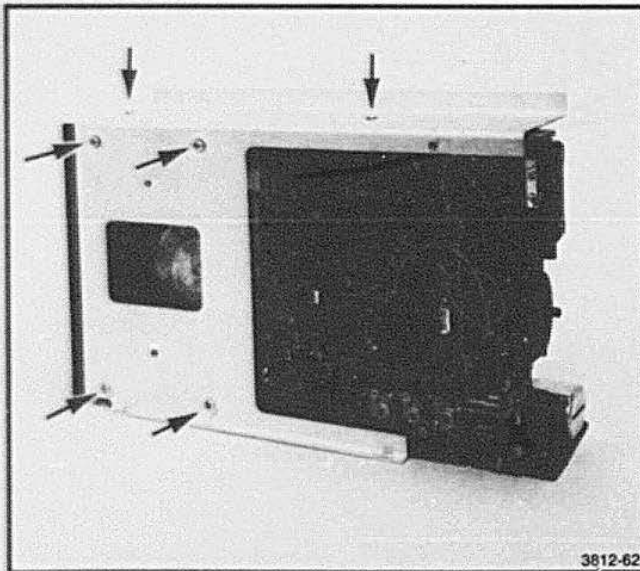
Drive Unit Enclosure Mounting Screws.
